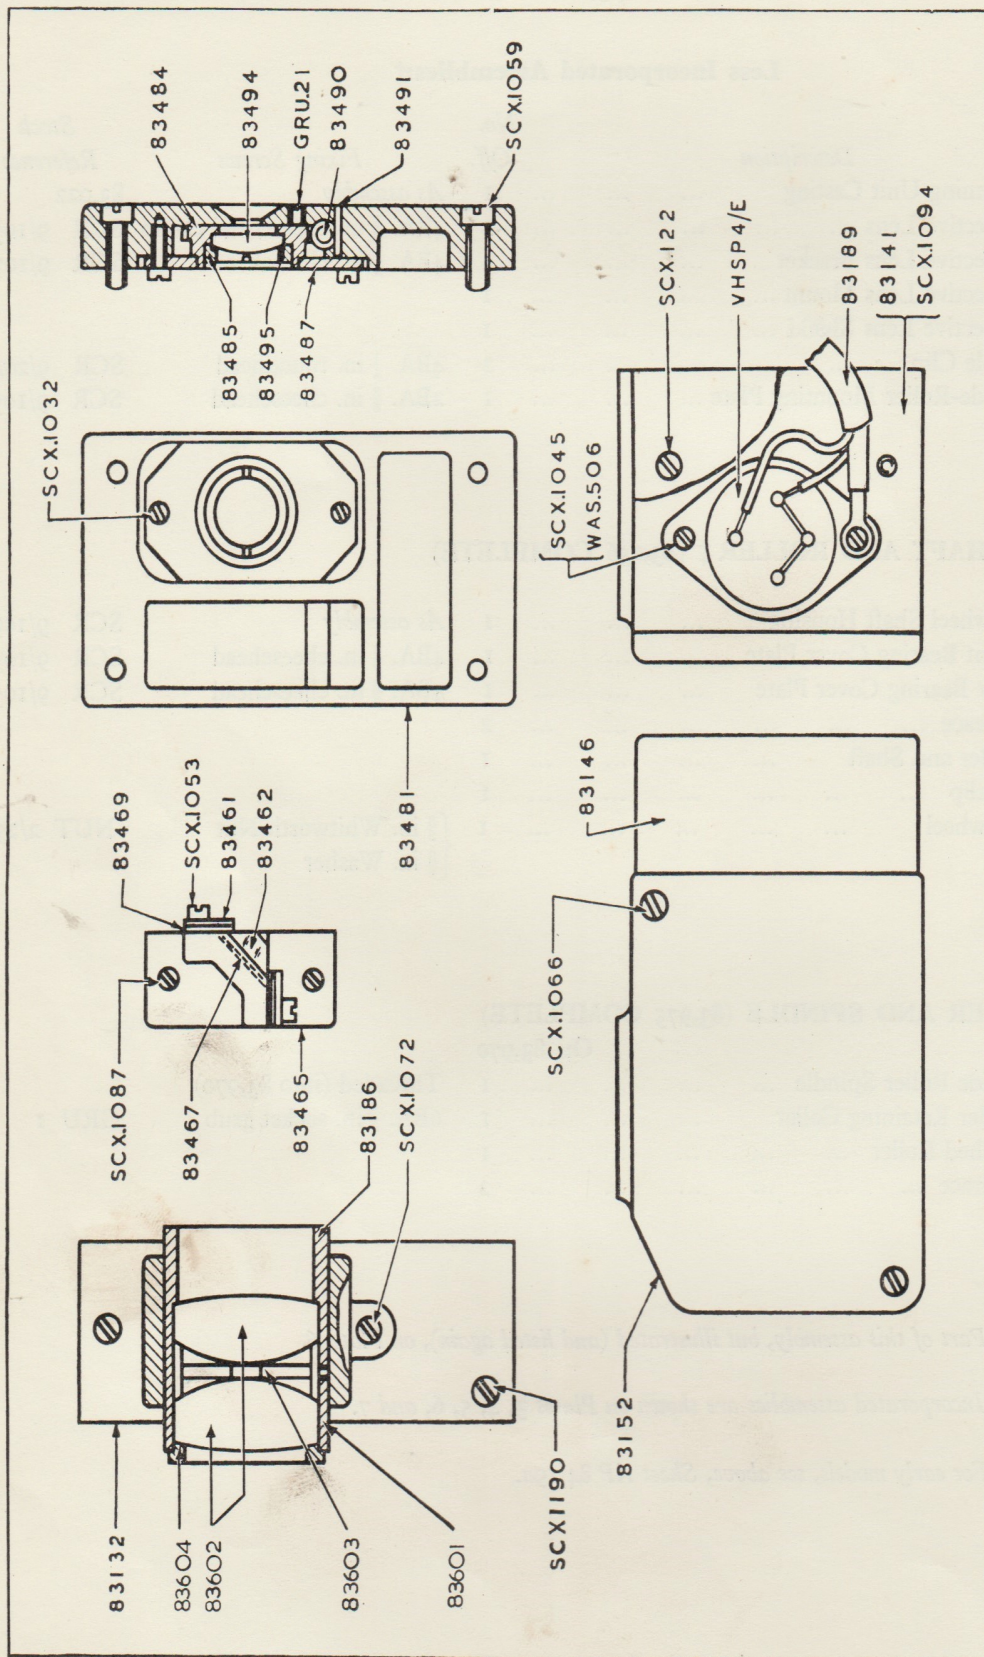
CELL HOLDER, CASTING, CONDENSER, SLIT AND SMALL PRISM
